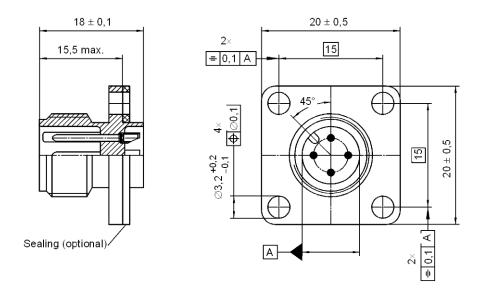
Tube insert, male contacts, mounting with thread M12  $\times$  1
